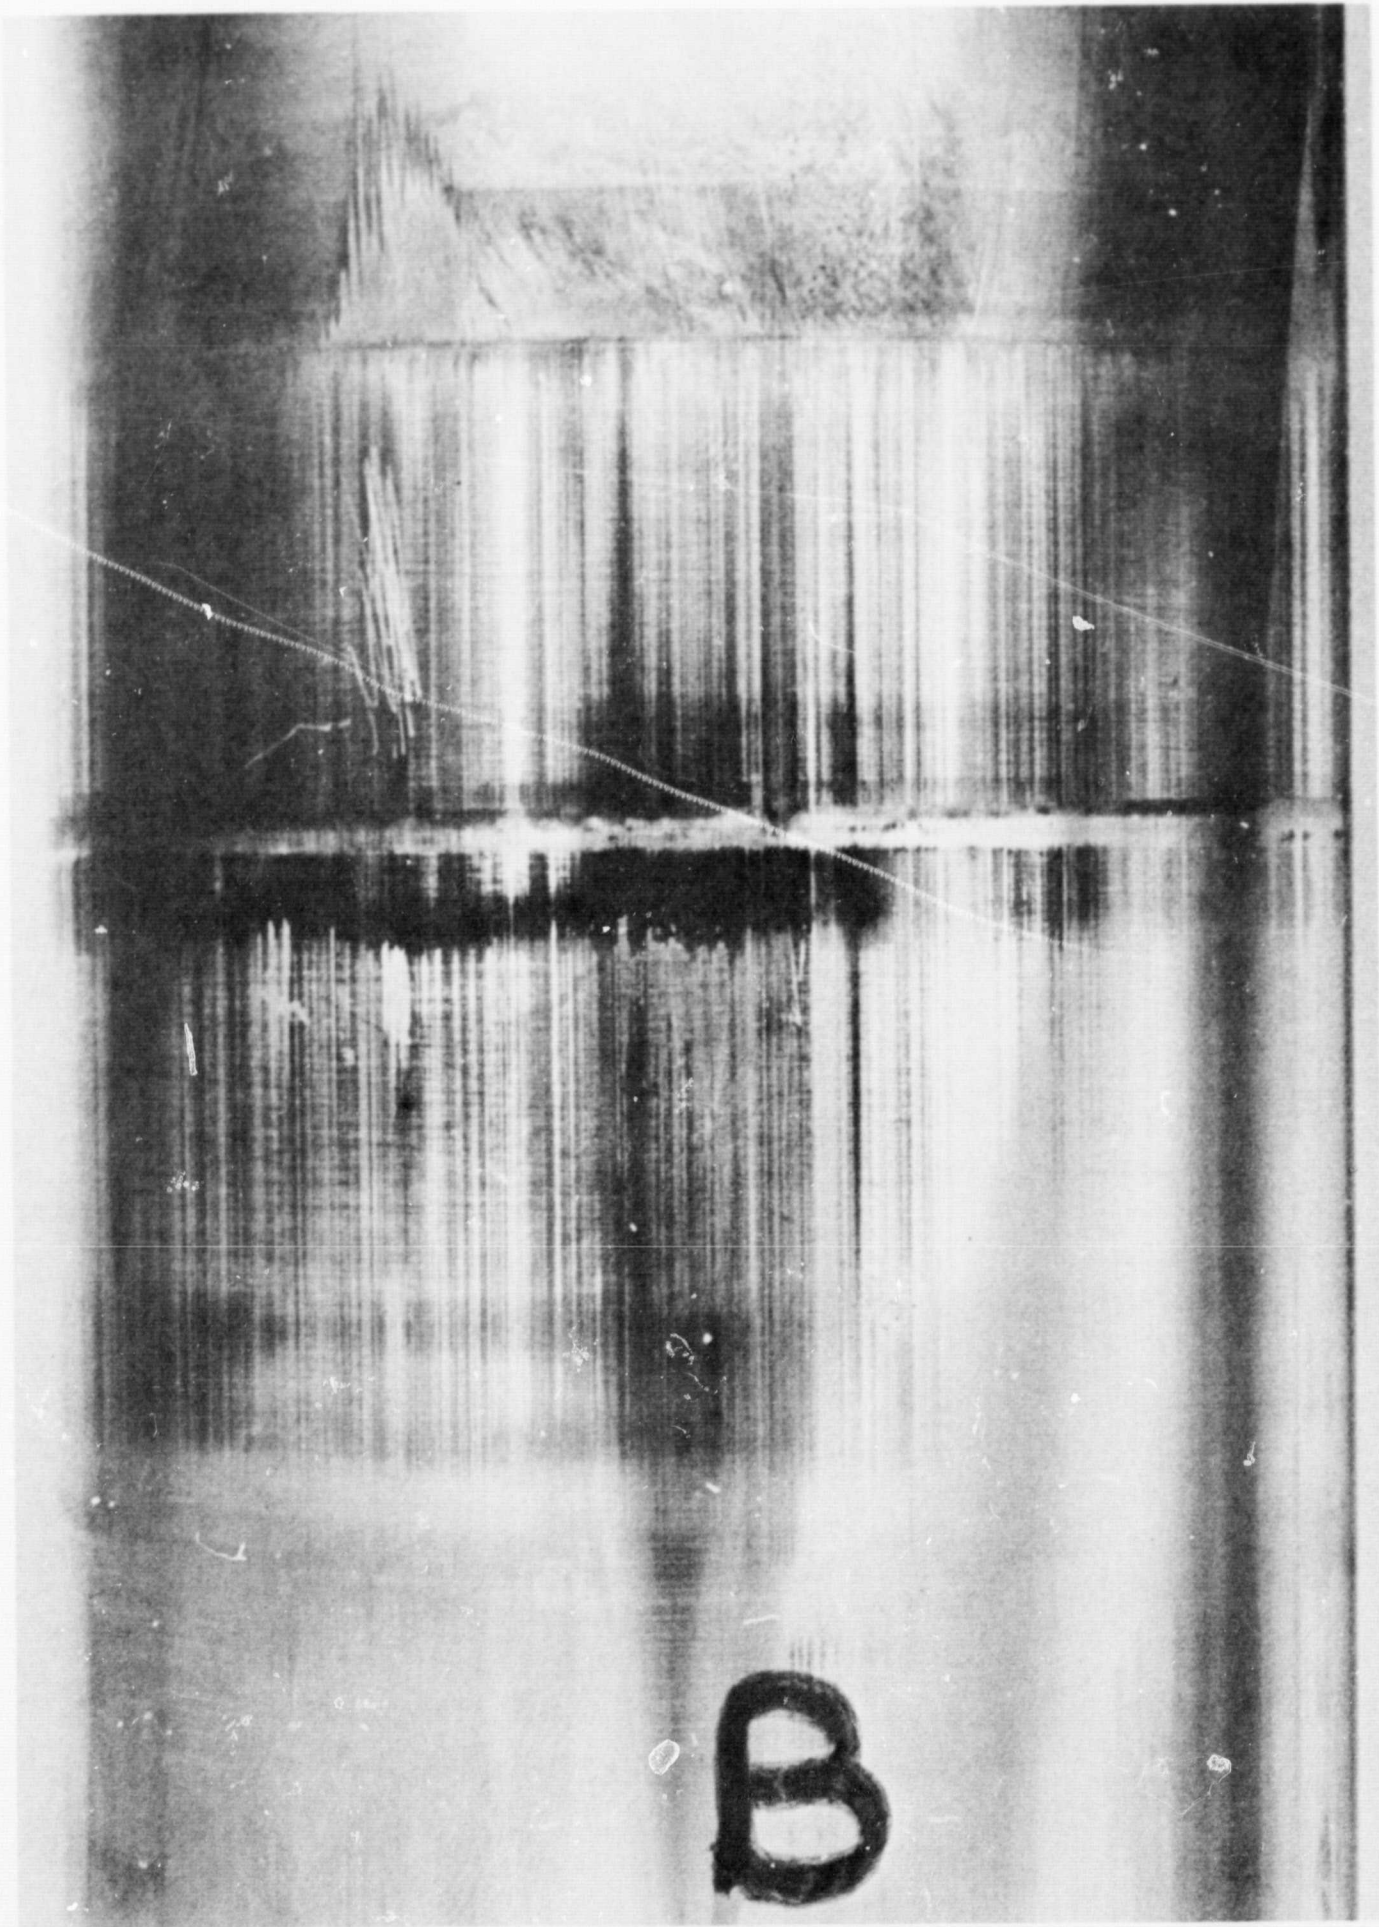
Piston Rod (B-End) Three-Inch Polyimide V-Seal
